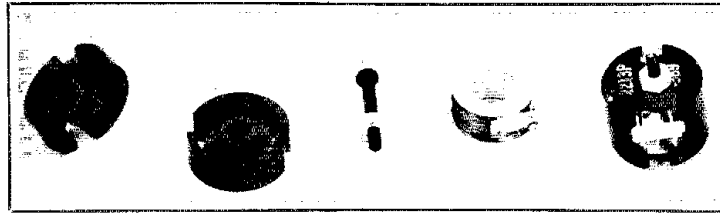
A pot-core or cup-core assembly. To the left is a break-down view of the core halves and the insulating bobbin that contains the coil winding. The unit at the right is a completed pot-core coil with the core halves bolted together.
